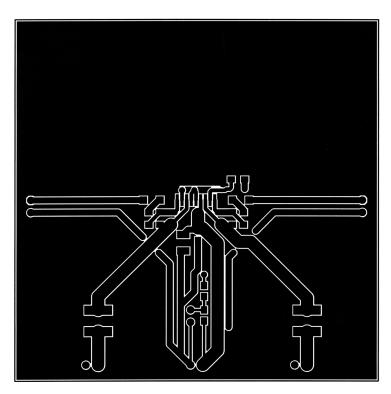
Recommended KTW SE PCB Layout: Top Layer
